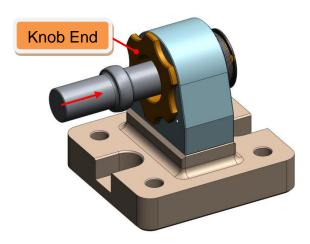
Locker Spherical Pin being inserted into Locker Sleeve.
